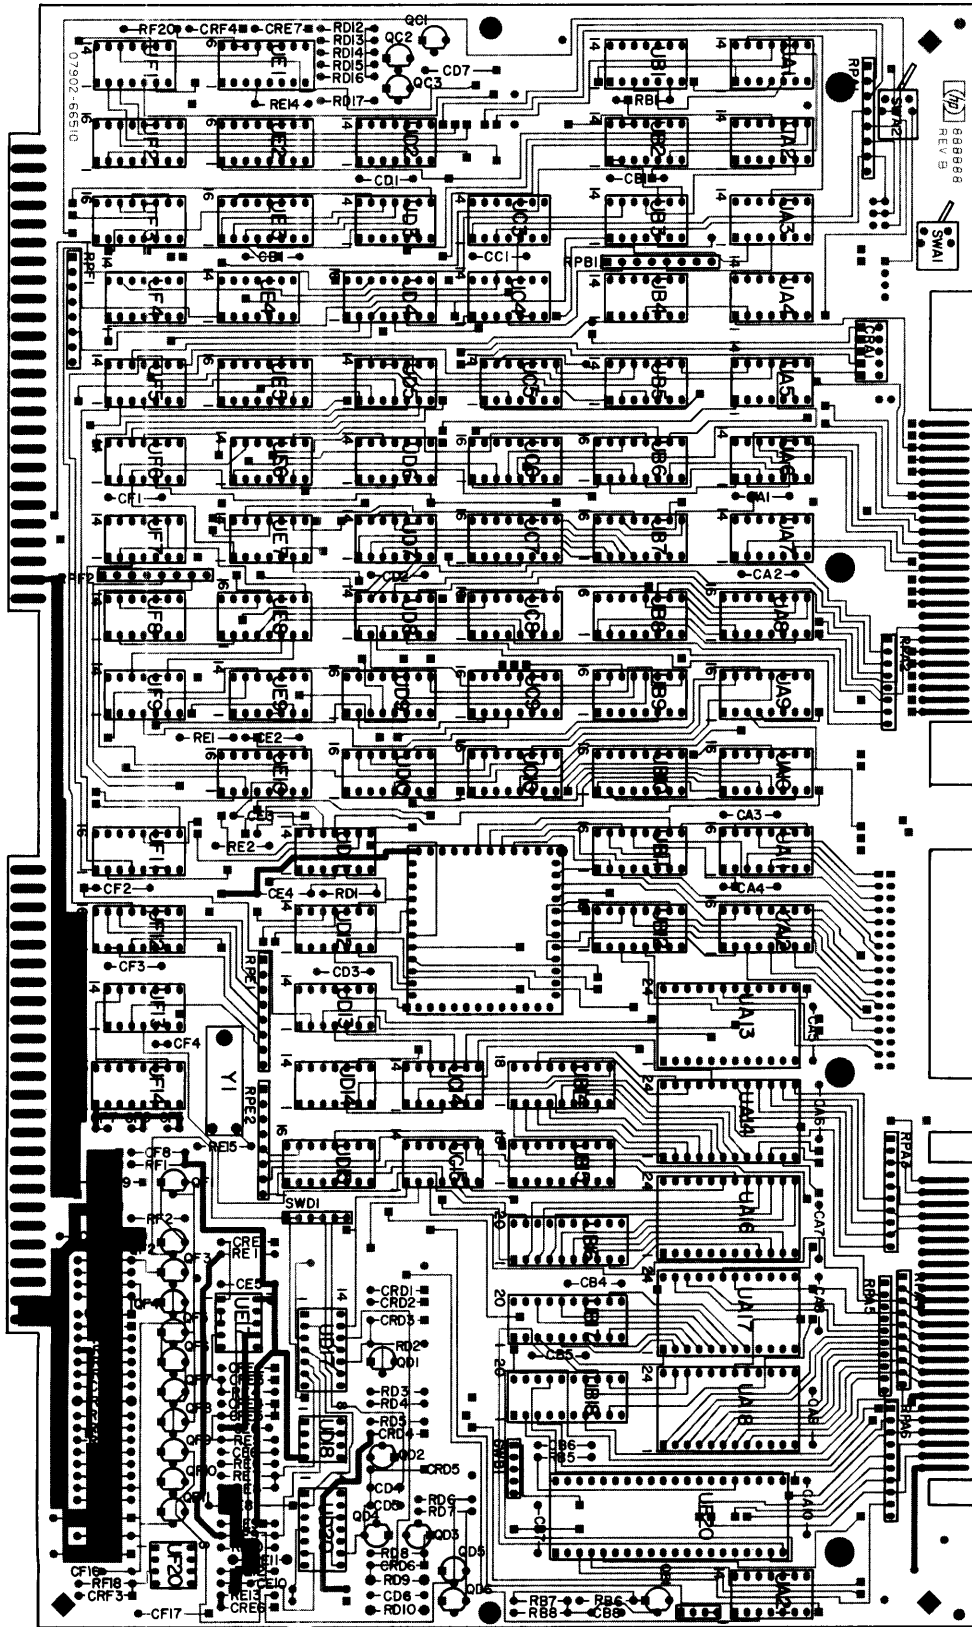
Controller Board A1 (07902-66510) Component Locator
